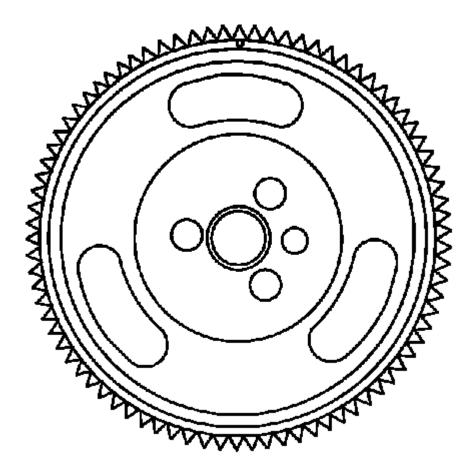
Locating Balance Shaft Drive Gear Timing Mark In The 12 O'clock Position Courtesy of GENERAL MOTORS CORP.
